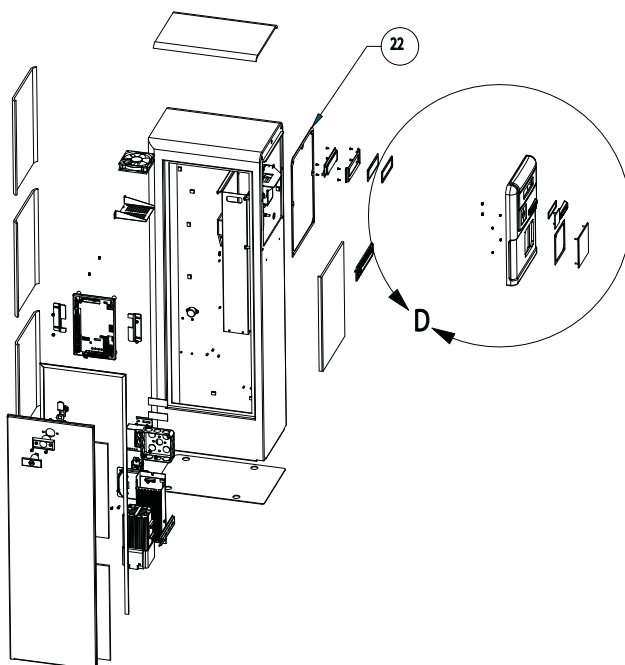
Barcode Exit Verifier (220VAC) Drawing, Detail D
